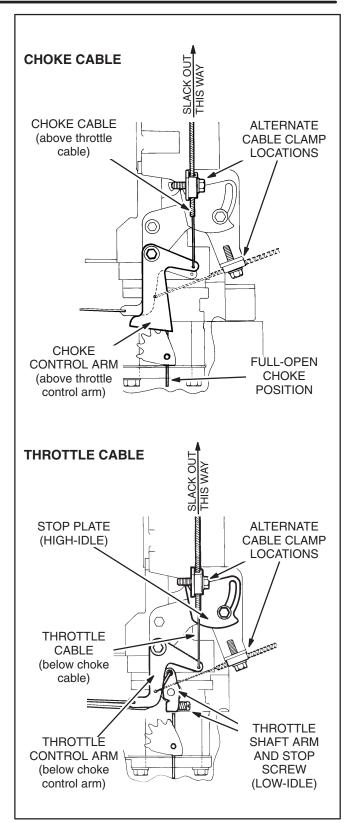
CHOKE AND THROTTLE CABLES
